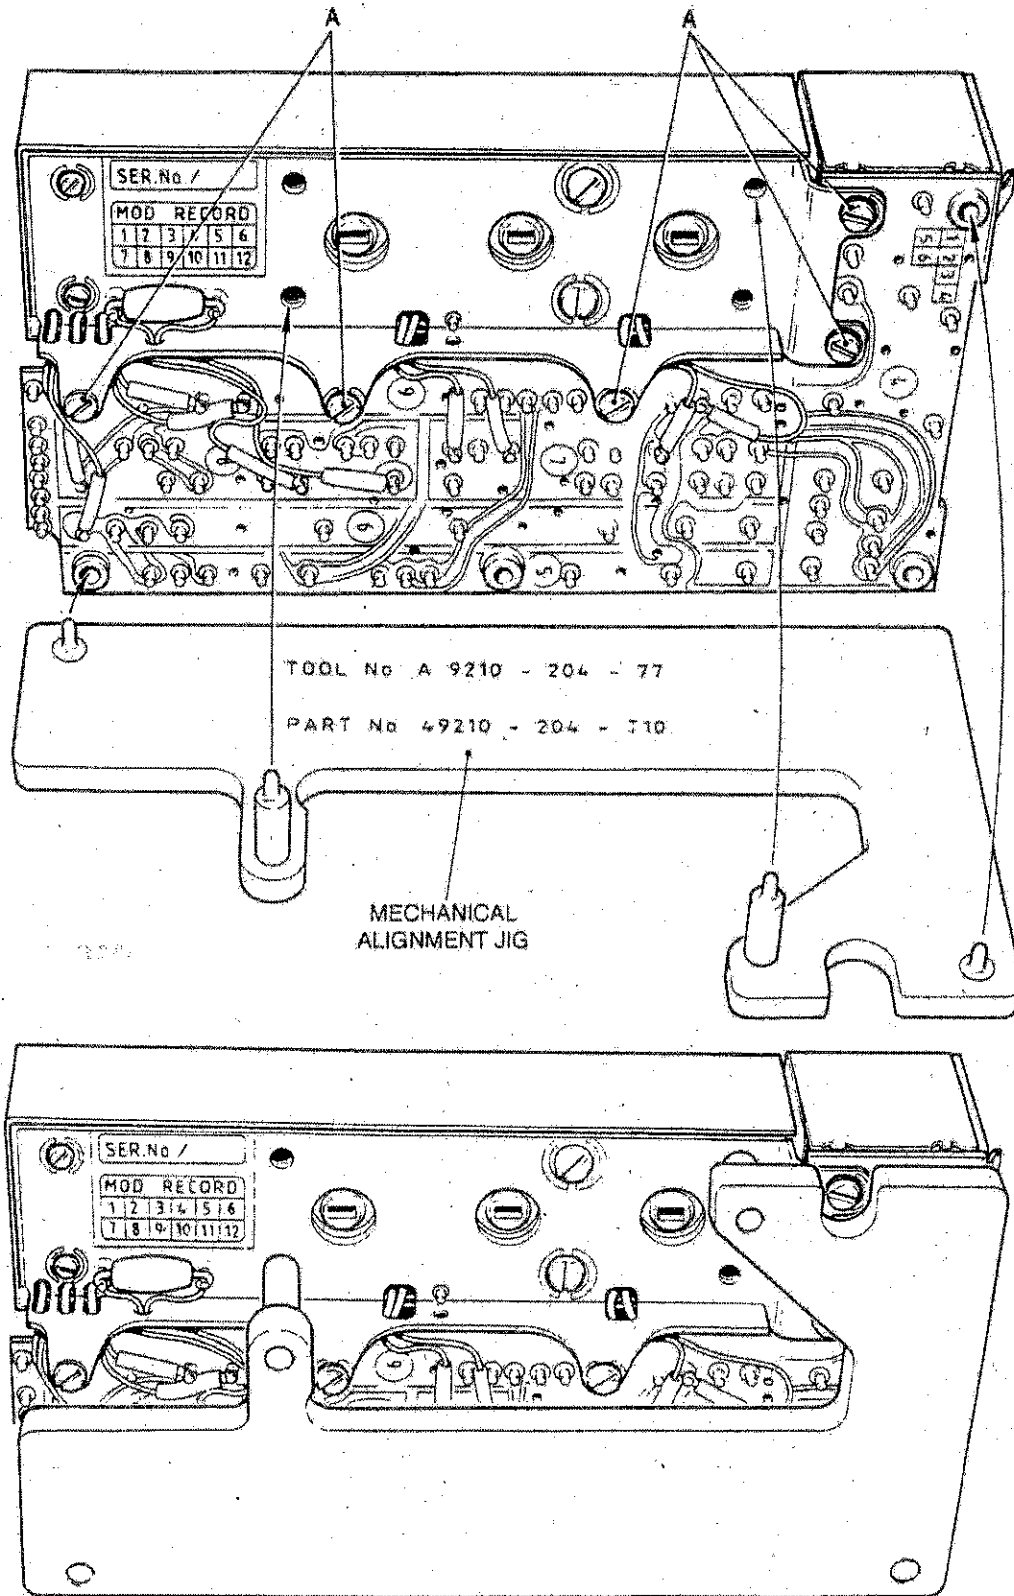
Fitting synthesizer-to-motherboard mechanical alignment jig
